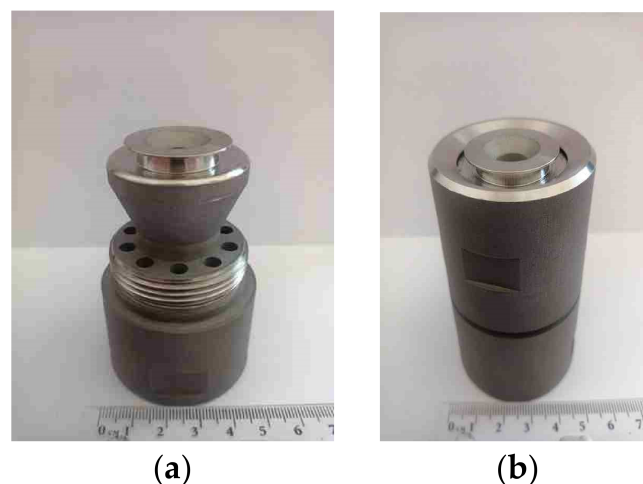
AM (SLM) produced burner's nozzles (a) nozzle showing the inside distribution channels (b) complete assembly with the cup.
